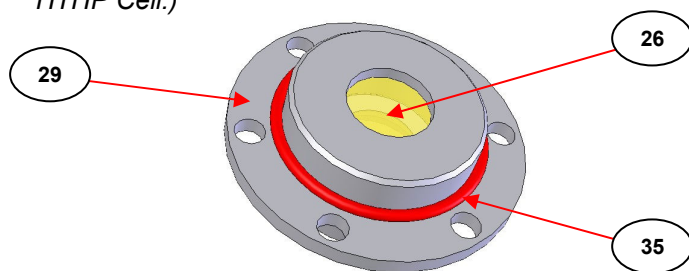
Window Assembly (11) with Silicone O-ring (35) Fitted
